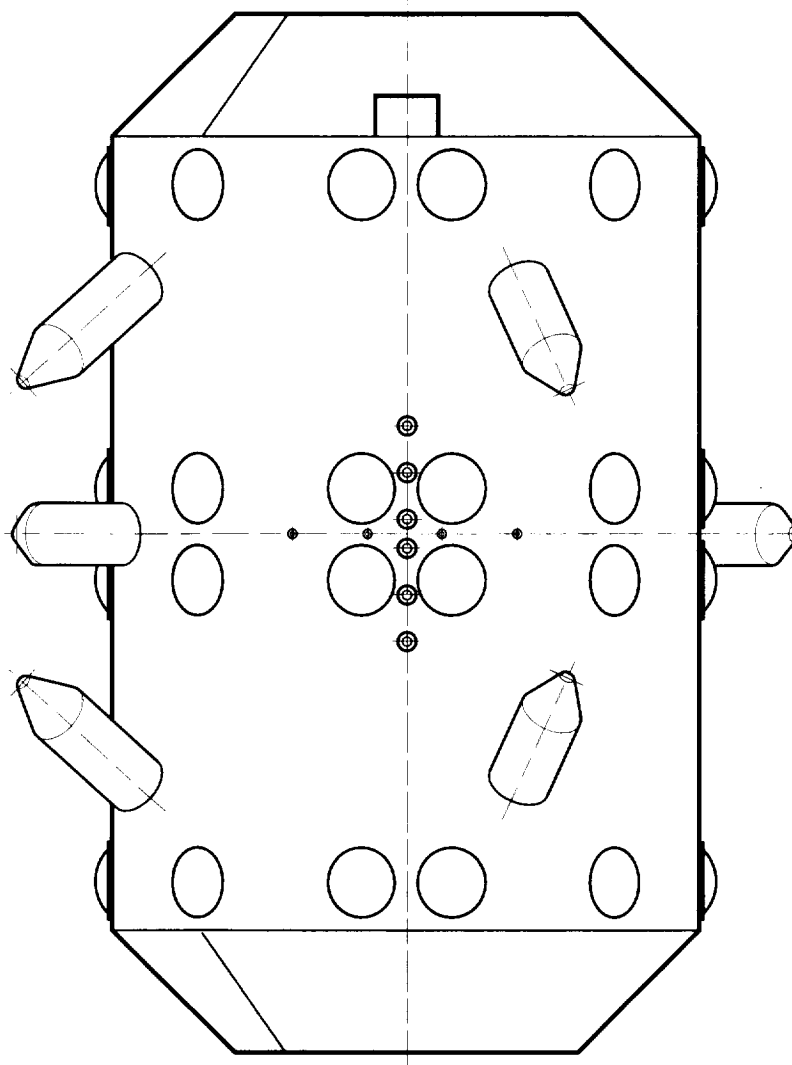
Large receiver tank multilayer insulation (MLI) blanket.
